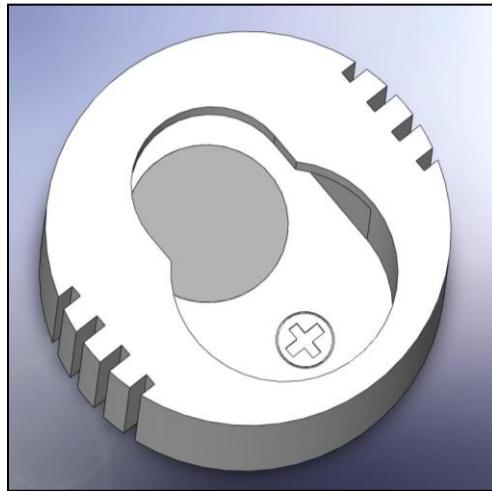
This figure shows a vertical track with a small machine screw. This screw would allow the track to be removed and replaced easily.
